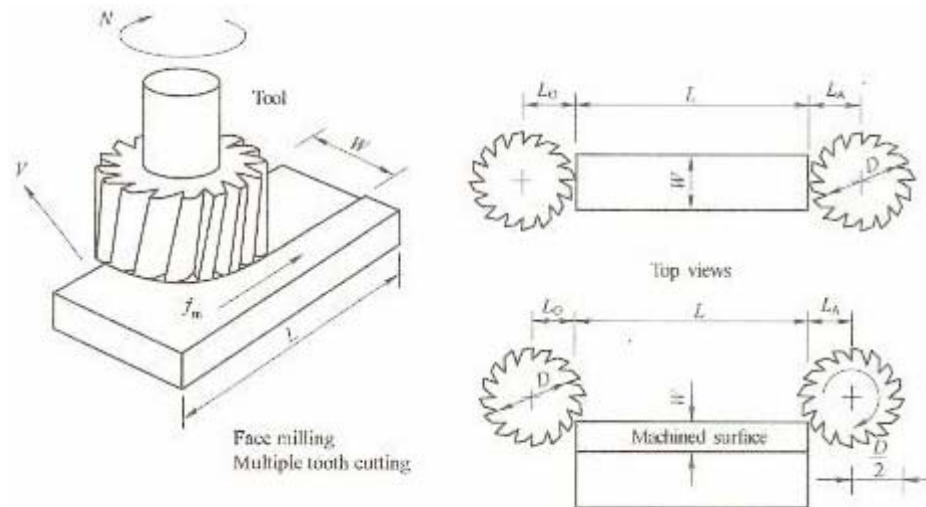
Face milling (<http://www.vulcanmold.com/article/Milling.html>)
